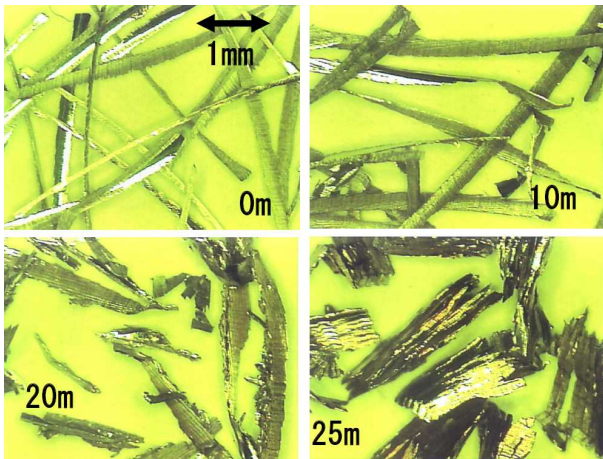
Photographs of chip (Endmill(A) Workpiece: SUS304)
